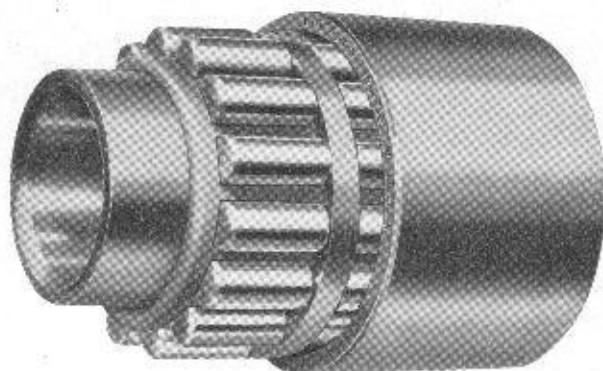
Hyatt railroad roller bearing partially disassembled.
